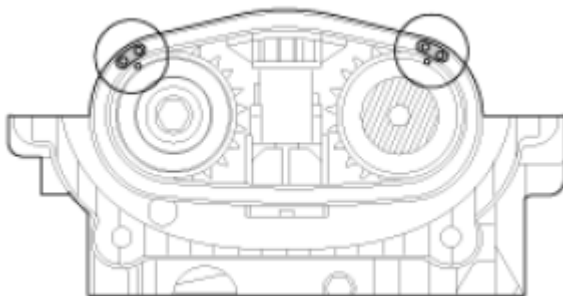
Identifying LH Camshaft Chain Timing Mark
